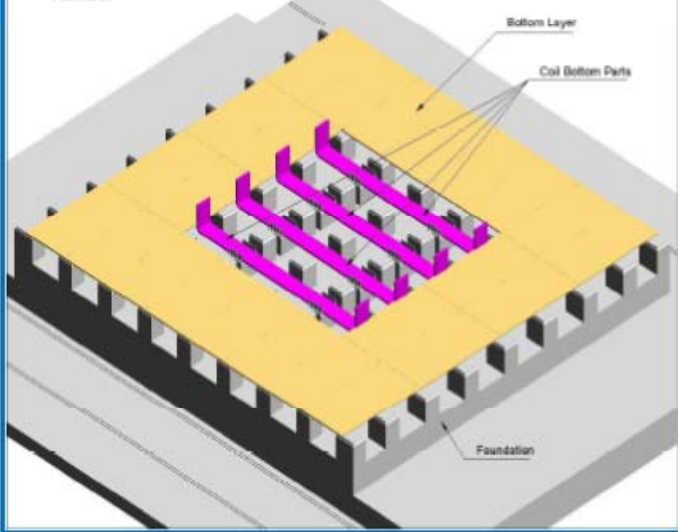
Spacers, Bottom Layer and Coil Lower Parts Installed in the Stack
